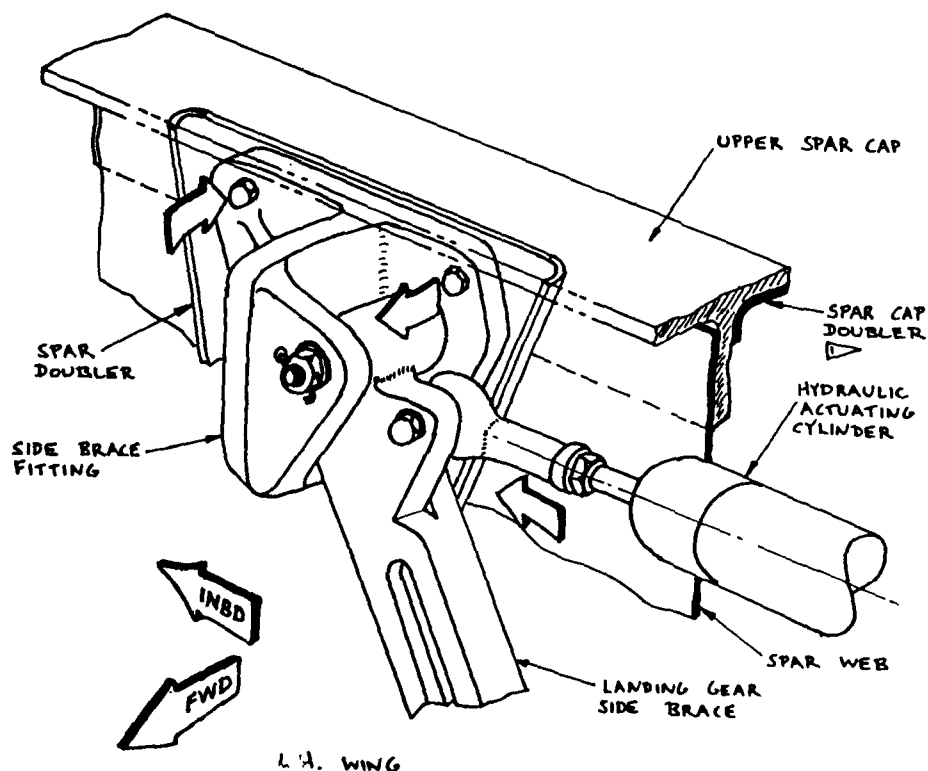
GULFSTREAM 112/114 MAIN LANDING GEAR SIDE BRACE FITTING SHOWING OUT-OF-PLANE BENDING LOADS APPLIED DURING GEAR RETRACTION
